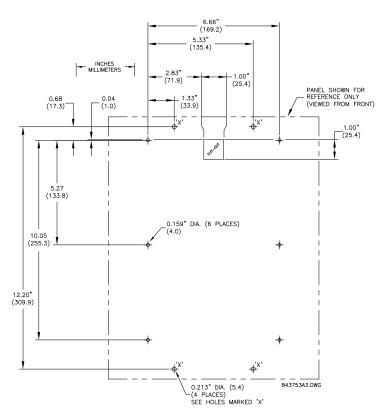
C30 VERTICAL SIDE MOUNTING REAR DIMENSIONS (STANDARD PANEL)
